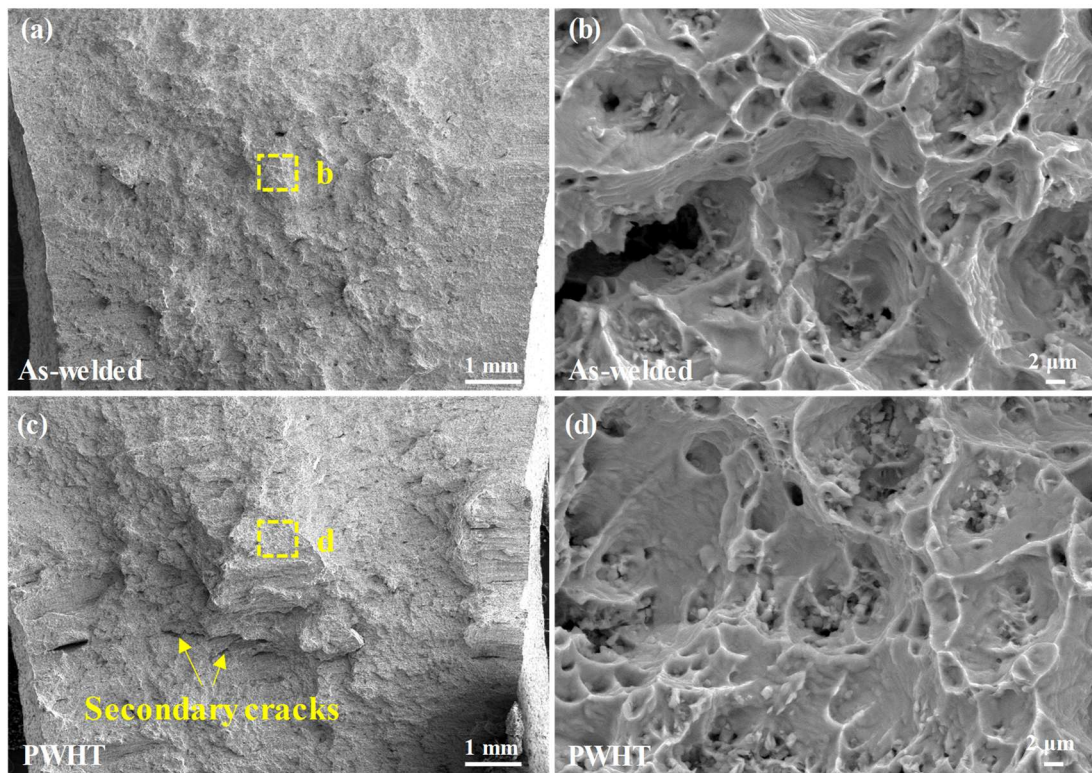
Fracture surfaces of impact samples: (a, b) as-welded state; (c, d) PWHT state.
